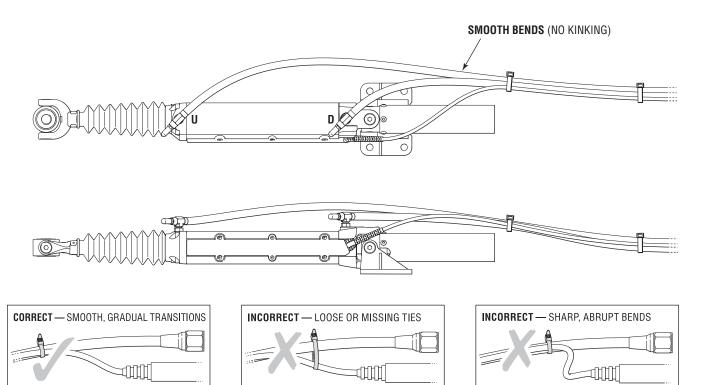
Sensor cable and hose routing checks. (Cylinder may not be exactly as shown.)
